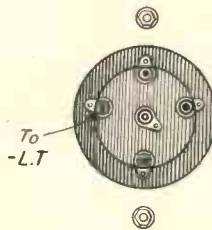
VIEW OF THE UNDERSIDE OF VALVE HOLDER.
